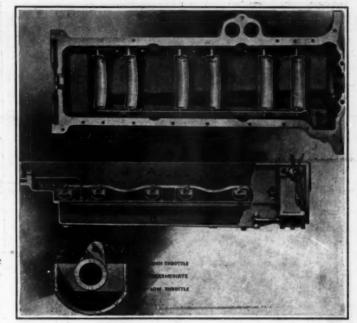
Plan and sectional views of oiling system, showing tilting troughs
